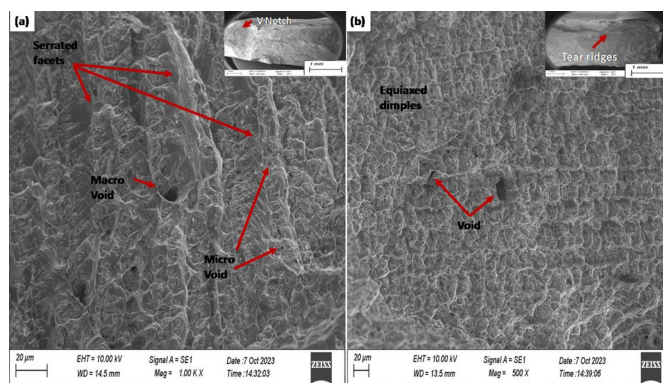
Impact-tested specimen fractography of (a) CCTIG (b) PCTIG
